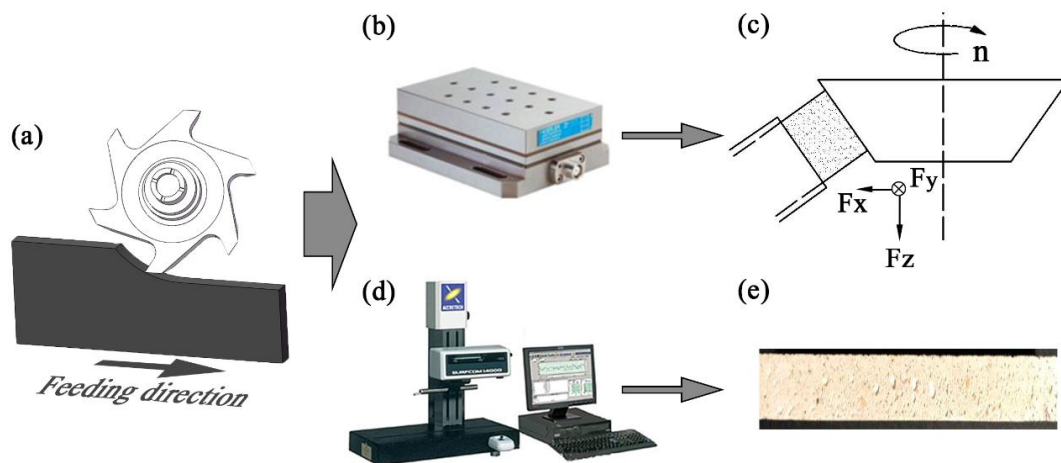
Schematic diagram of the cutting experiment: (a) tapered cutting, (b) dynamometer, (c) cutting force diagram, (d) surface profiler, (e) machined surface.
